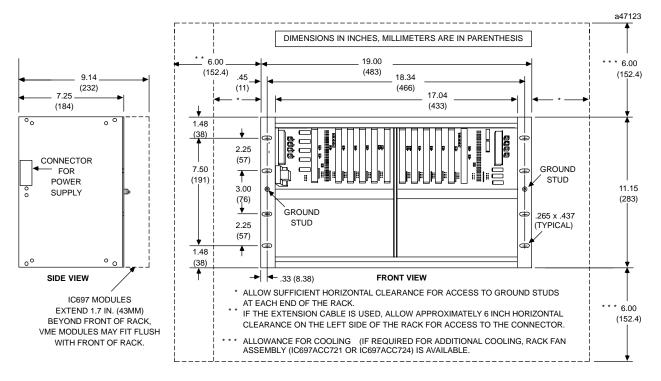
Redundant Rack Dimensions for Panel (Front) Mount
